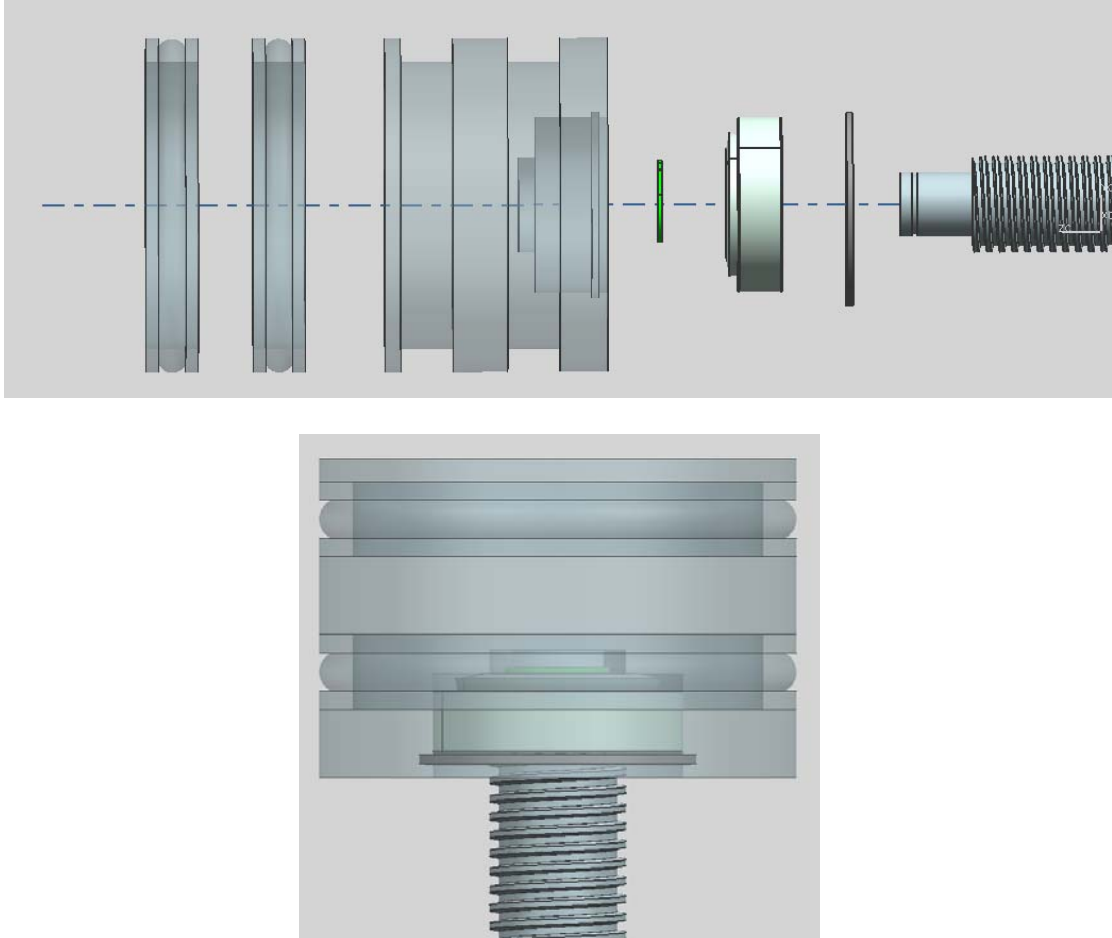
Piston/shaft sub-assembly, exploded view (top), assembled (bottom)
